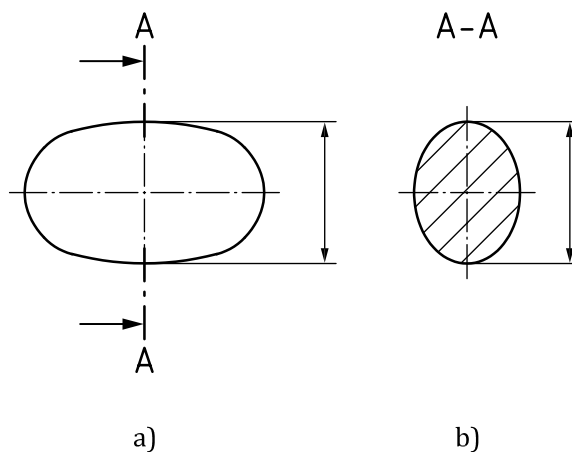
Example of measurement of the maximum diameter of longer direction of a capsule endoscope
